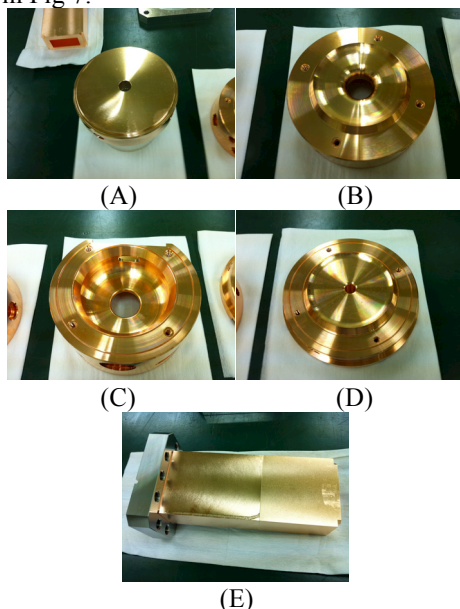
Parts of ECC-rf-gun (A): End plate (B): Half cell (C): Full cell (D): ECC (E): Waveguide.
